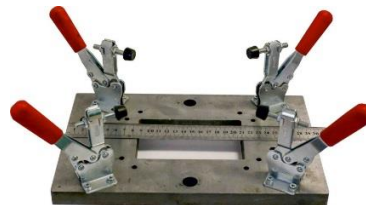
Steel frame for specimen fixation during quasi-static indentation test.
